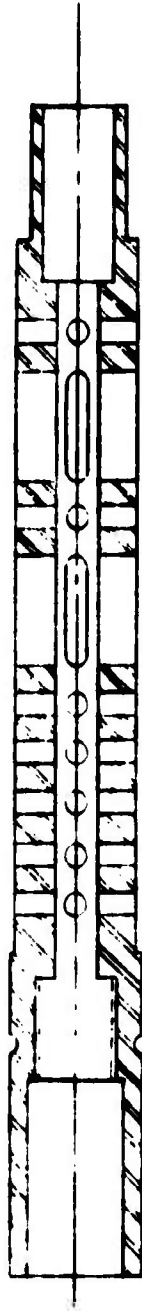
CROSS SECTIONAL VIEW OF 28 HOLE - 8 SLOT BARREL EXTENSION
